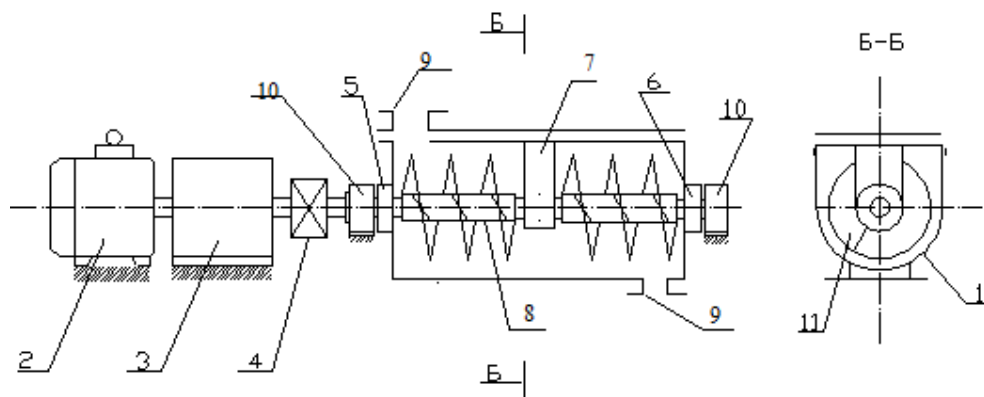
Screw conveyor diagram. 1-trough, 2-motor, 3-reducer, 4-coupling, 5,6-bearing, 7-suspended bearing, 8-screw shaft, 9-input and output openings, 10-bearing, 11-blade.
